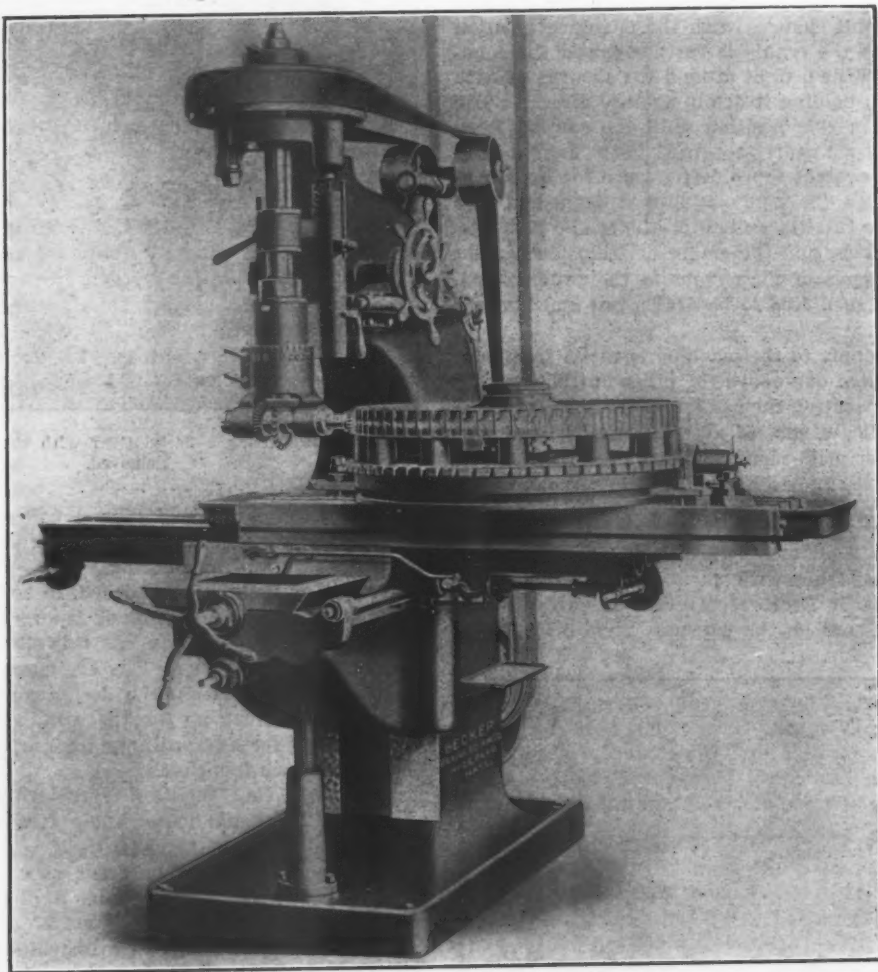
The No. 6 Vertical Milling Machine Built by the Becker-Brainard Milling Machine Company, Hyde Park, Mass., Equipped with the New Horizontal Milling Attachment.
